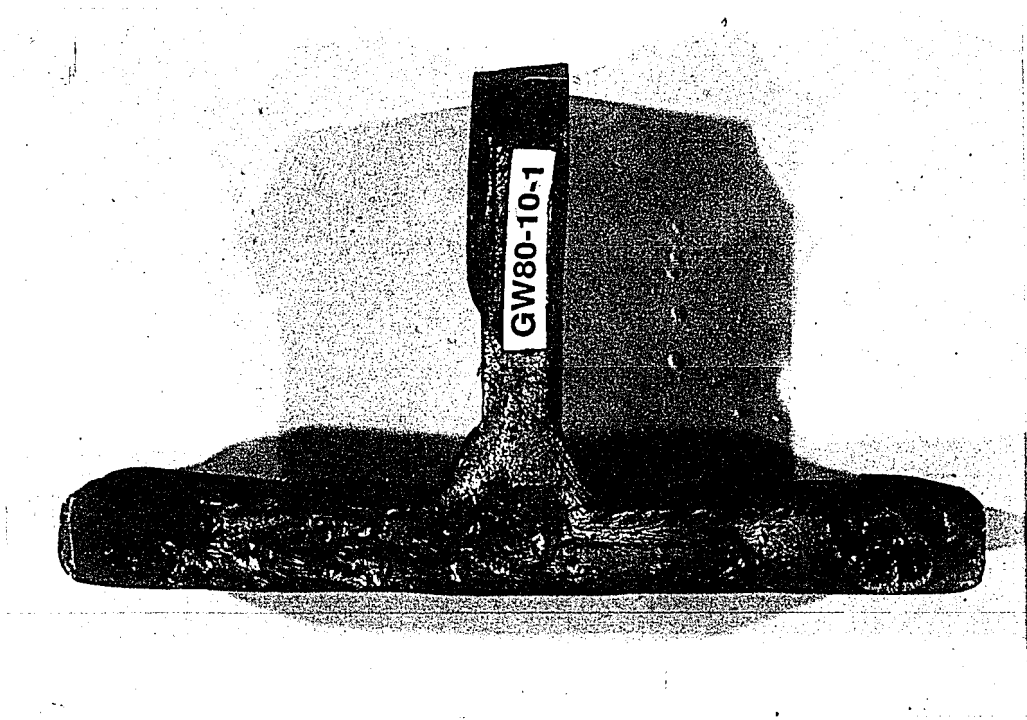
Typical Slag Inclusion in Transverse Groove Weld.
